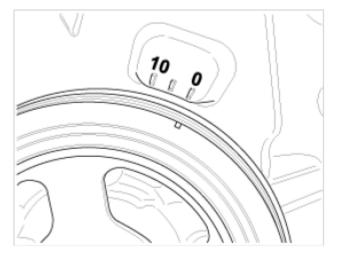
Aligning Crankshaft Groove With Timing Mark Of Timing Chain Cover Courtesy of HYUNDAI MOTOR AMERICA
